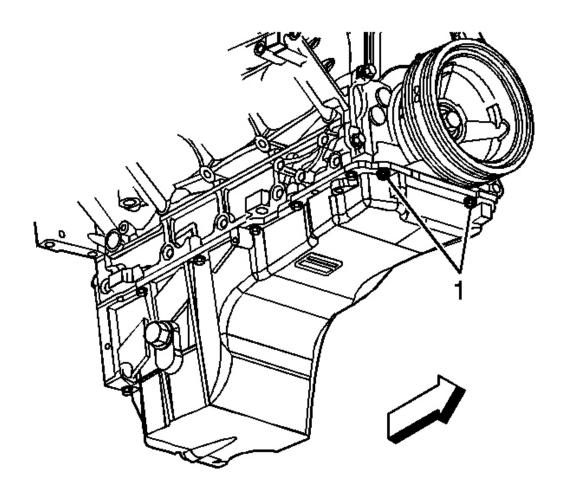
View Of Oil Pan-To-Front Cover Bolts
